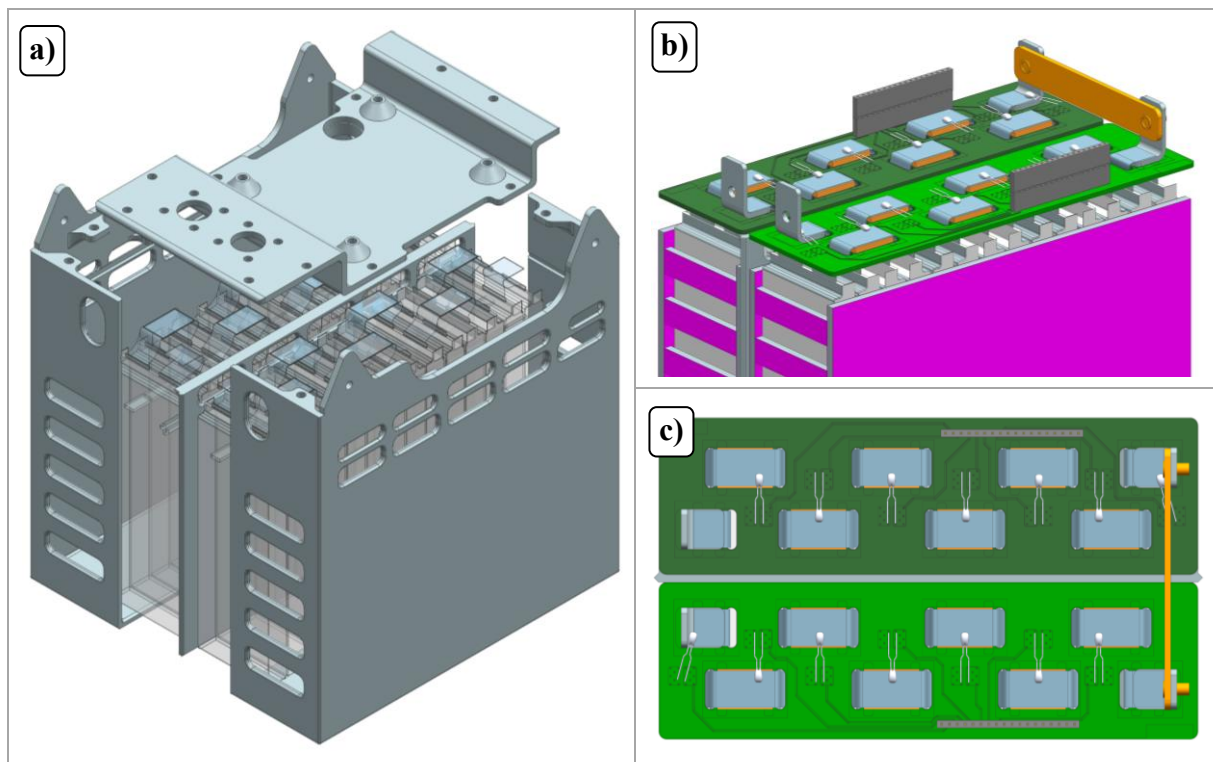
Mechanical design of the module – a) 3D printed 4-part casing, b) c) cell joining PCB with temperature sensors
